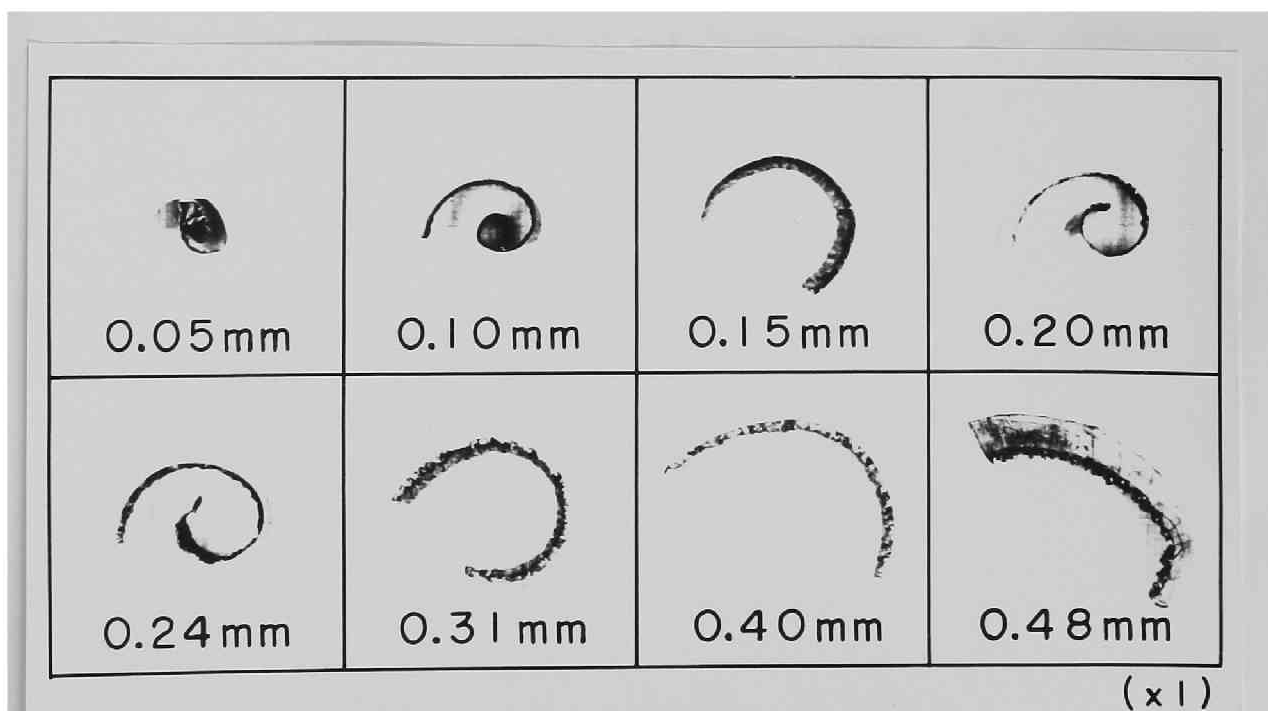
Photographs of chips obtained by orthogonal cutting of lead in relation to depth of cut [Tool material, high-speed steel SKH 2(18-4-1); rake angle, 0 deg; clearance angle, 6 deg; width of cut, 6.0 mm; cutting speed, 9 m/min; dry]
